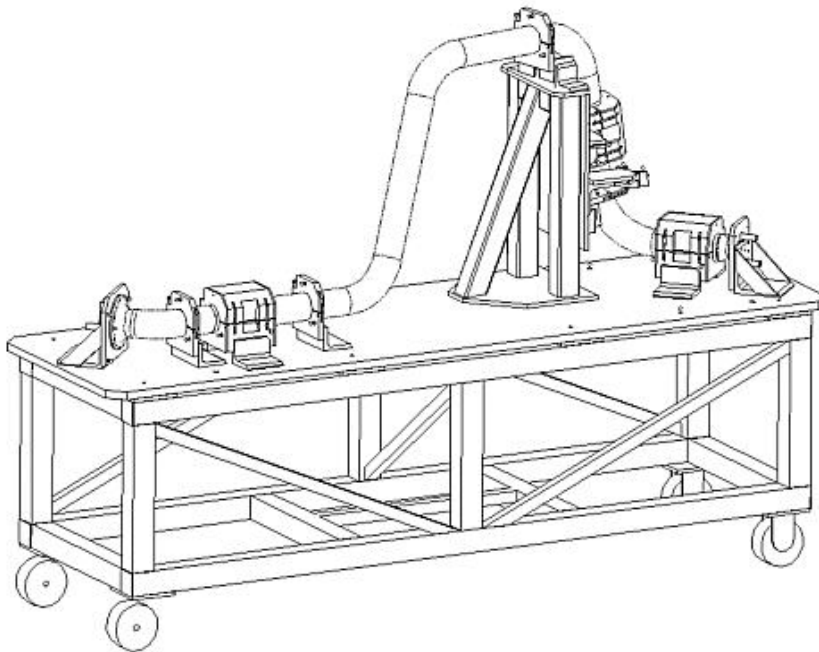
Mobile fixture holding parts of an exhaust system for welding.
